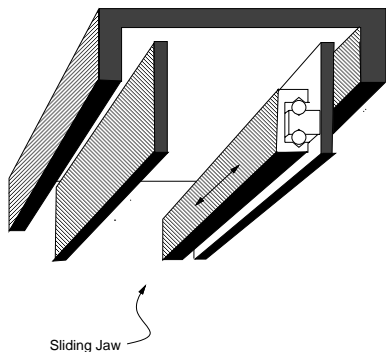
The modified gripper with sliding jaw. (Based on drawing by Ben Brown).
